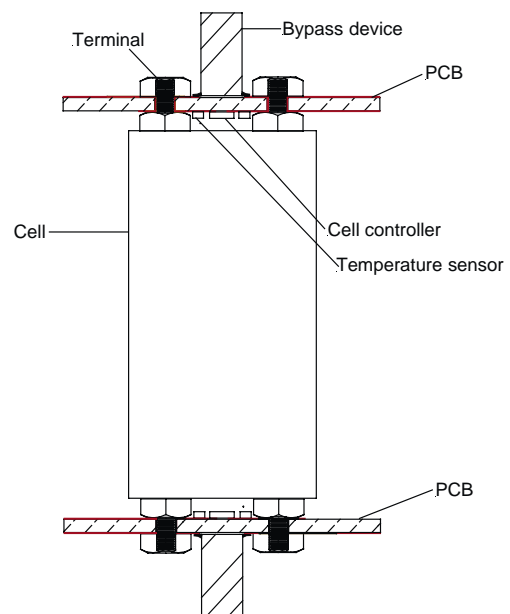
Diagrammatic view of cell mounting on PCBs.
